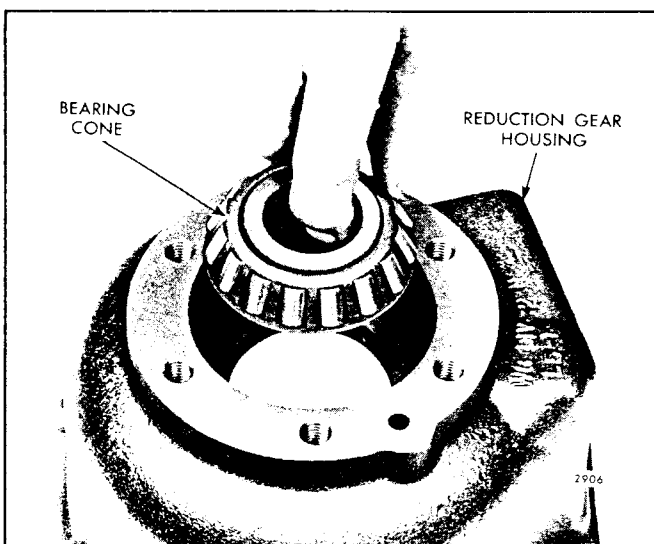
Installing Reduction Gear Drive Shaft Inner Bearing Cone in Gear Housing
